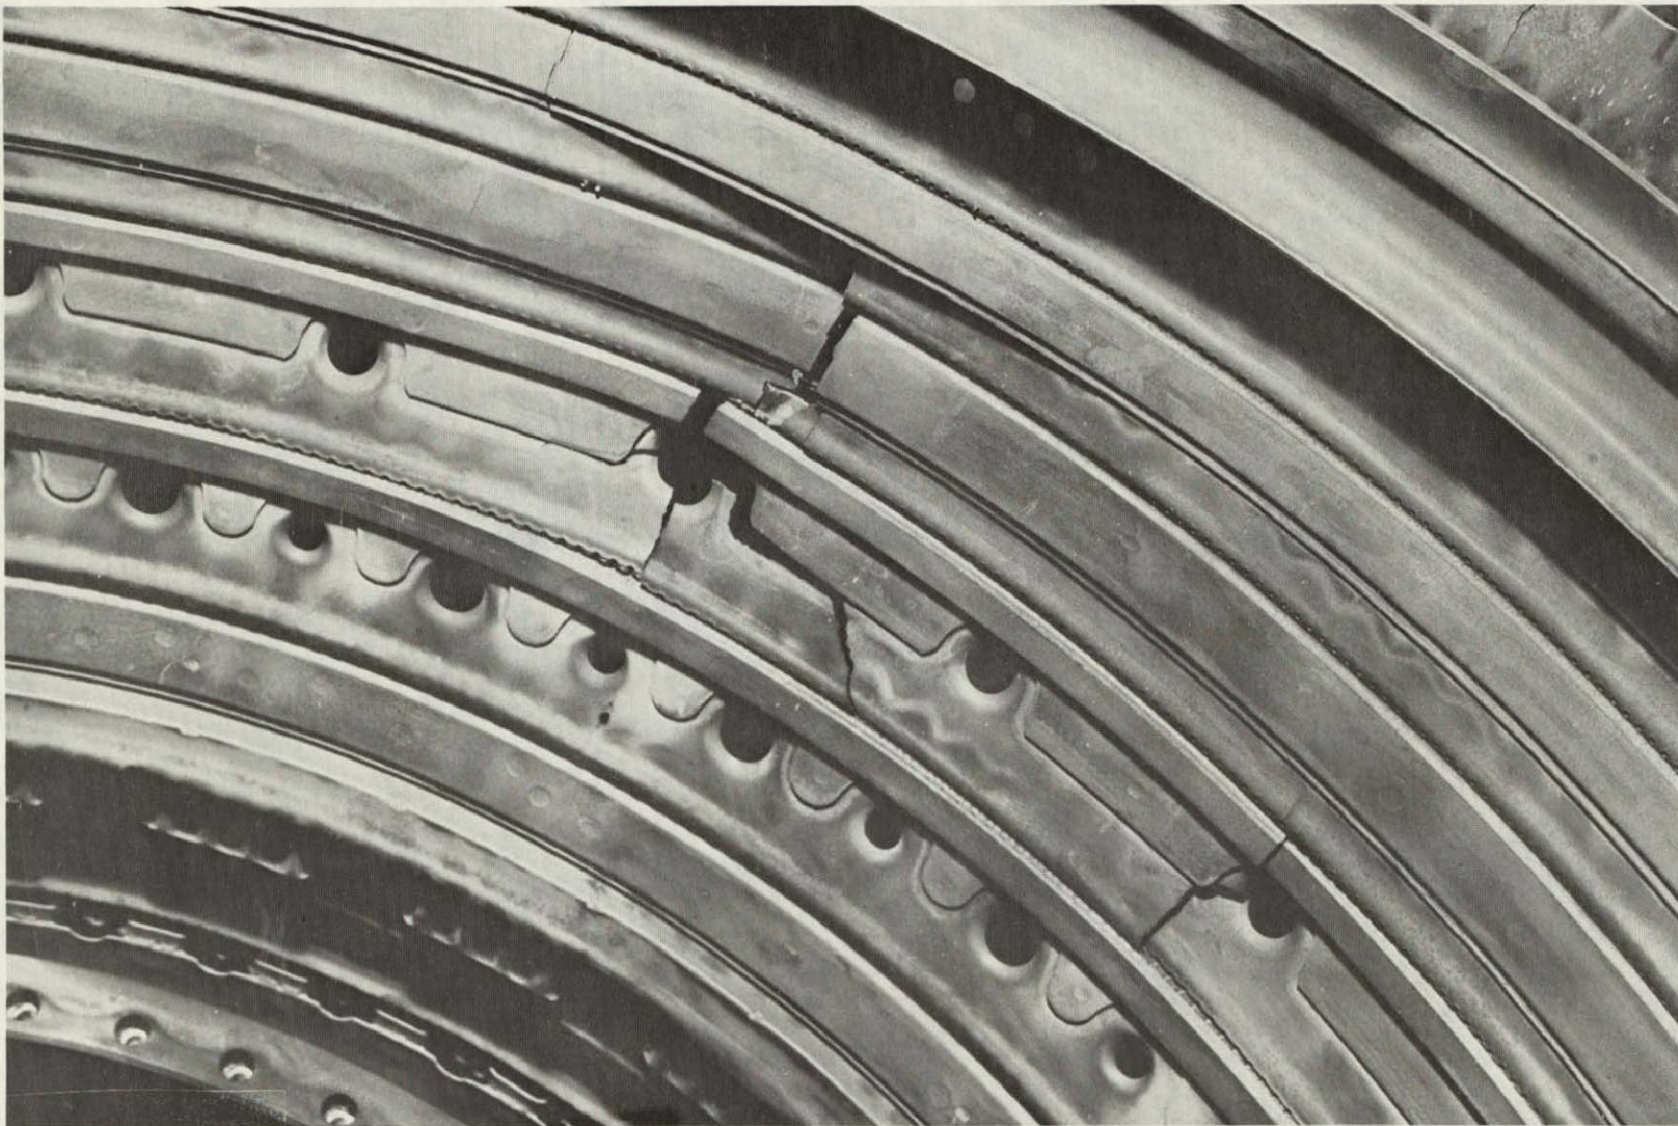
Combustor, Closeup Crack at 7 o'clock.
